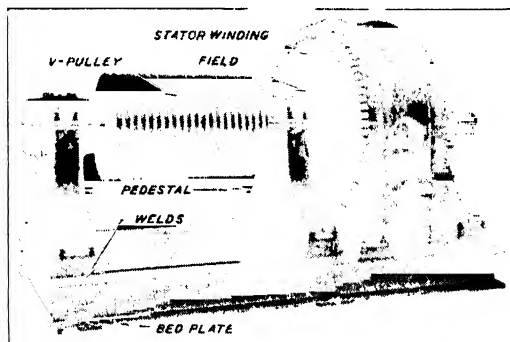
Three-Phase, 60-Cycle Synchronous Motor with Out-board Bearing and Sheave for V-Belt Drive (300 Hp, 80 Per Cent Power Factor, 600 R p m, 2,200-Volt)
